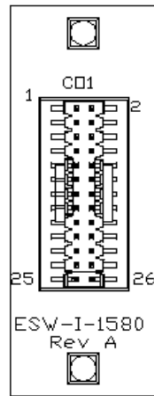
ETAF11 - Mechanical Dimensions and Component Placement
